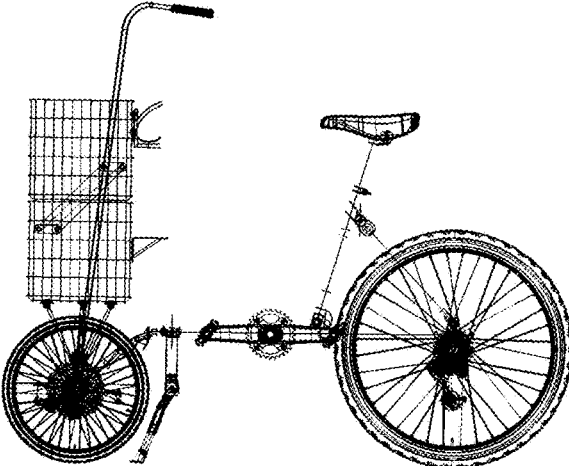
is an elevation similar to FIG. 7 but showing the basket assembly stowed; FIG. 10 is an elevation similar to FIG. 8 but showing the basket assembly stowed.
